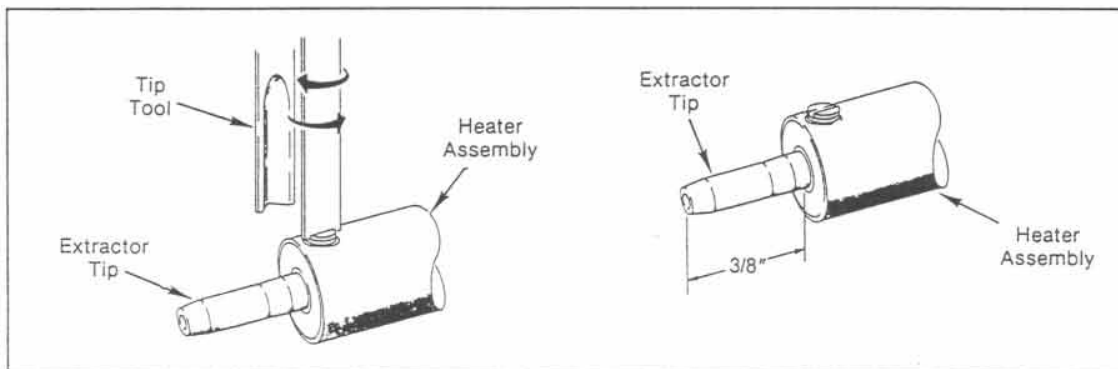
EXTRACTOR/SOLDERING IRON TIP REPLACEMENT
